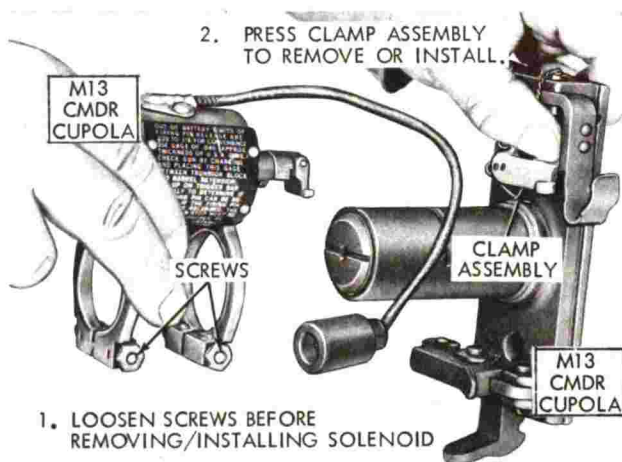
Disassembly/assembly of back plate group (M1, M13, Commander's Cupola). (1 of 3)
